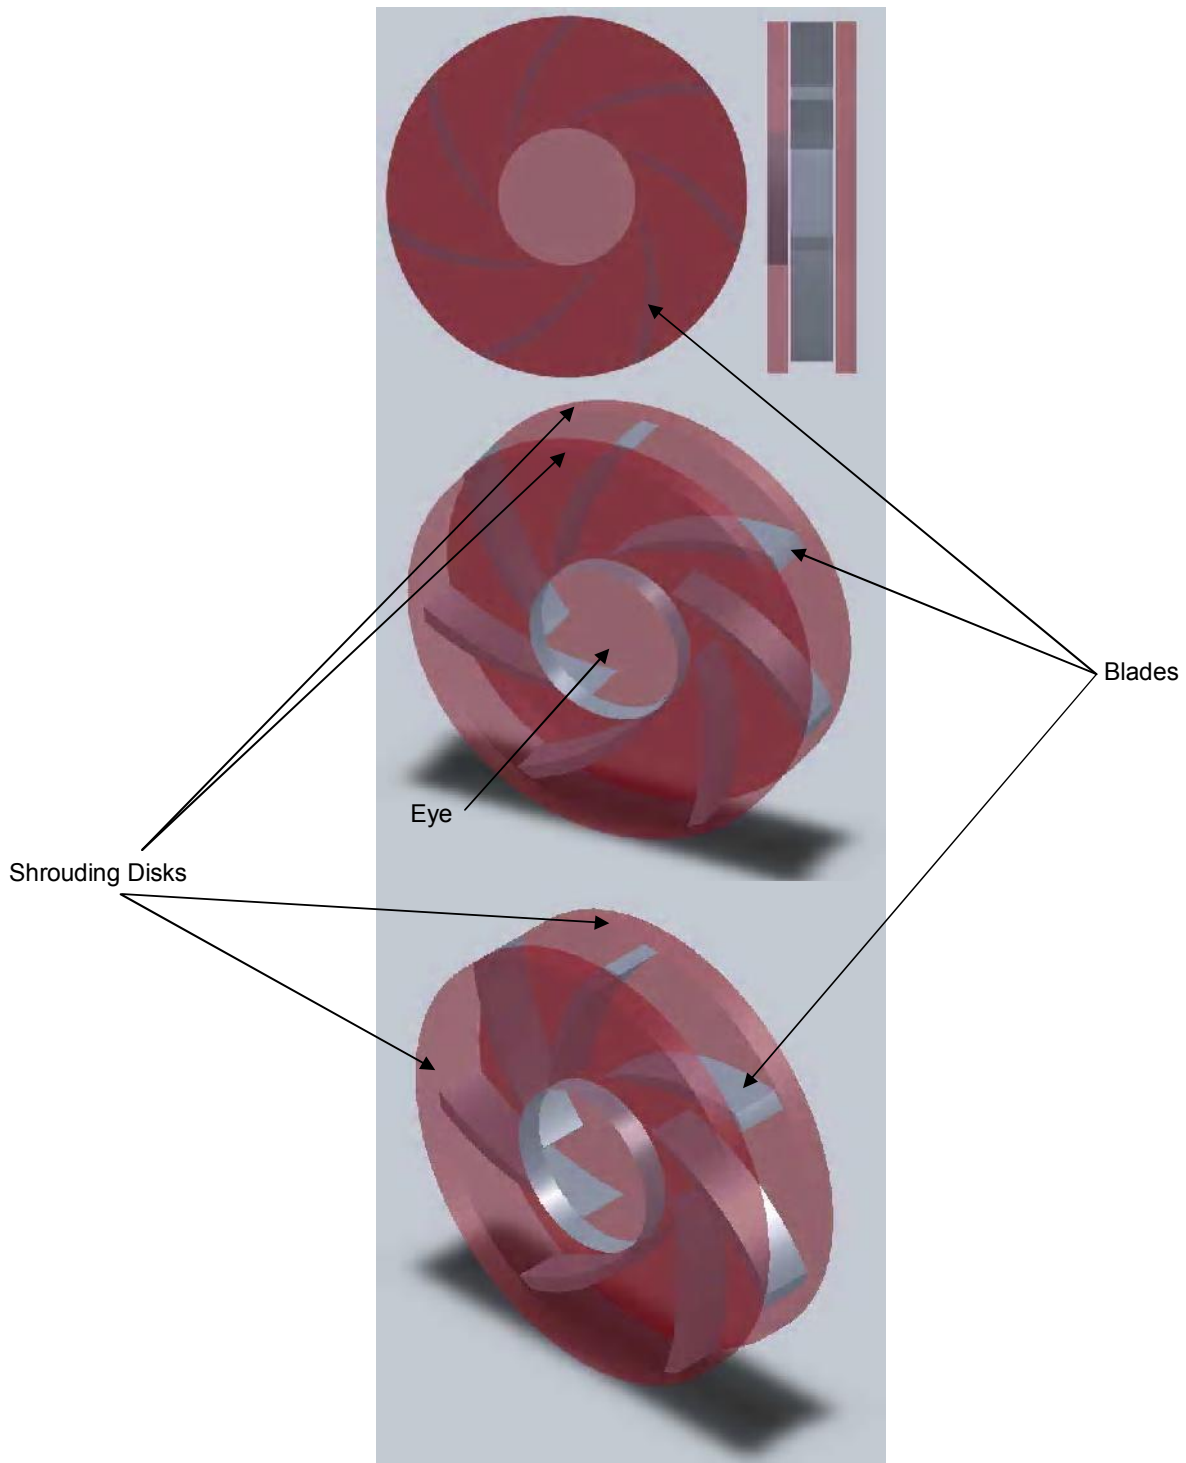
3D Solid Model of Centrifugal Pump Impeller showing blades, eye, shrouding disks
